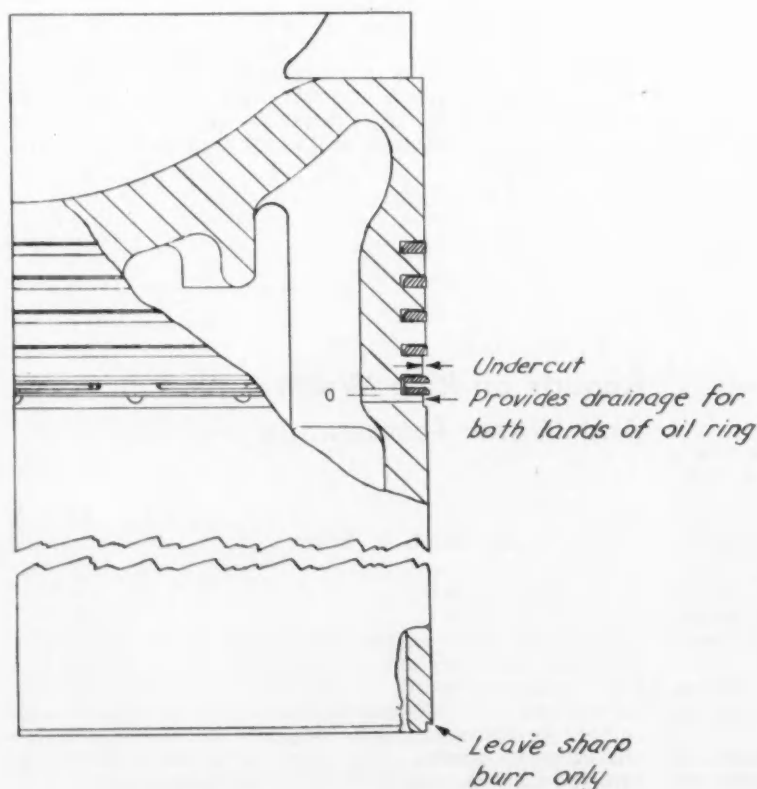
By making the three modifications shown in this four-cycle diesel engine piston, the piston can enhance oil control. The changes are: (1) sharp edge on bottom of piston skirt, (2) Drain-back holes designed to give adequate drainage for oil-control ring lands, and (3) undercut on land between oil control ring and lowest compression ring
